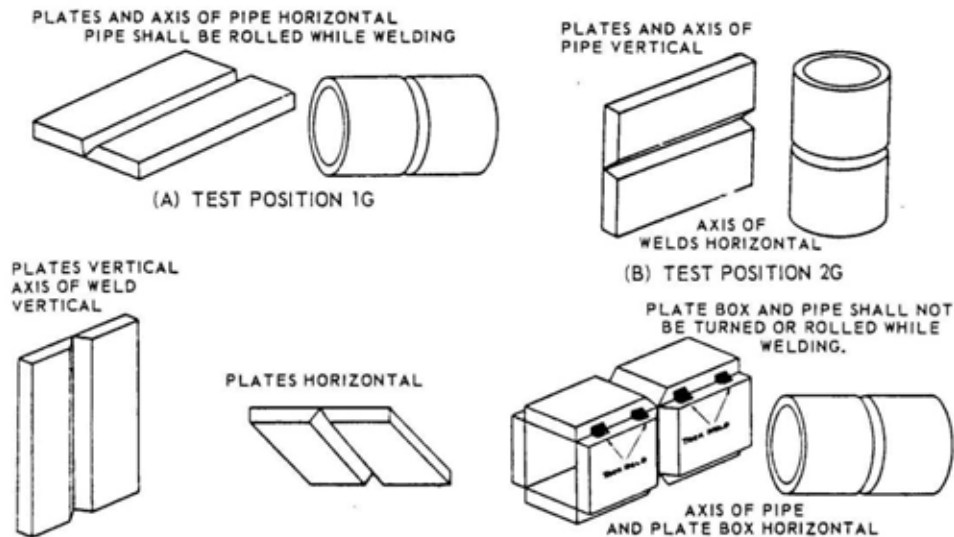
Positions of plates and pipes for groove weld.
